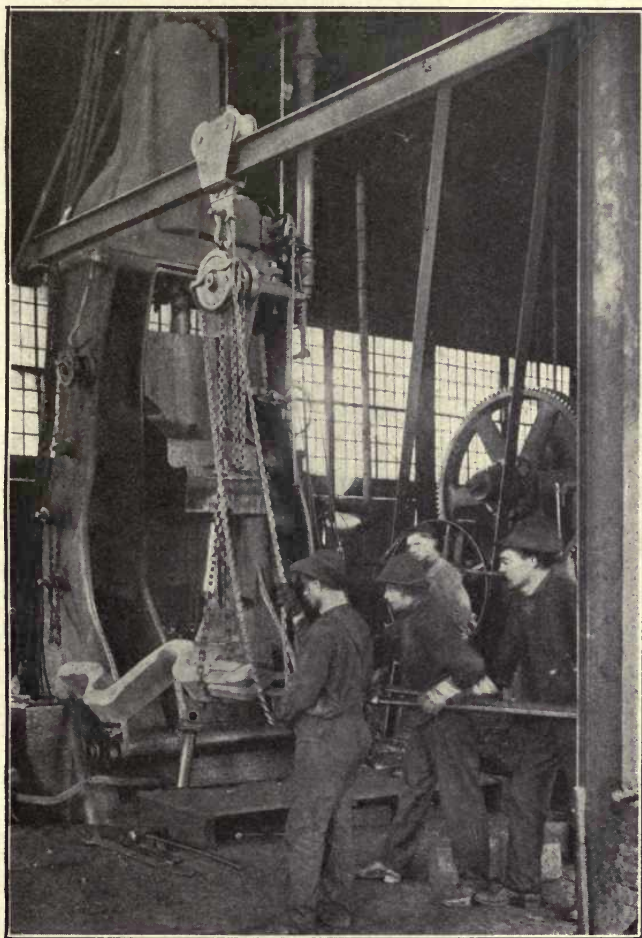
Removing partially forged 400-pound crank-shaft.
